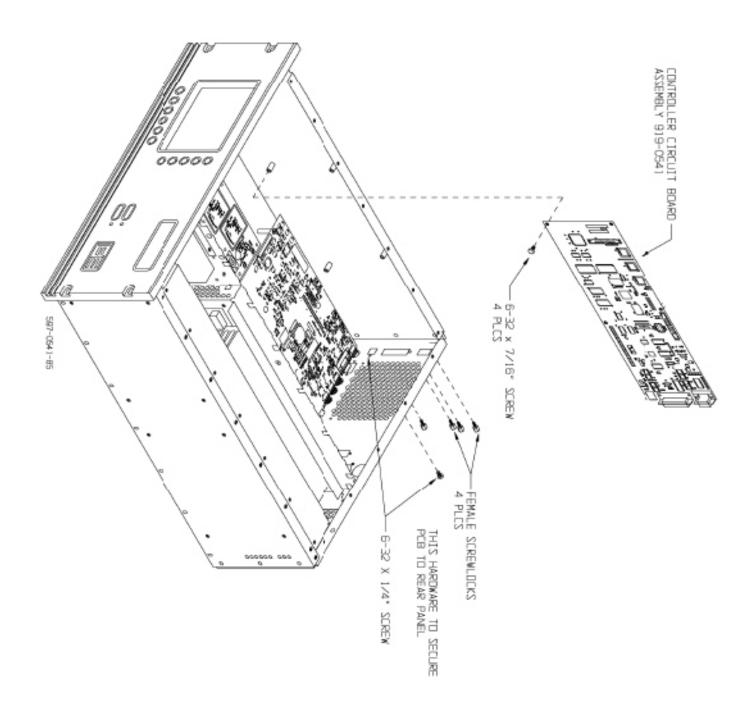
FXi CONTROLLER BOARD REMOVAL AND REINSTALLATION (SHEET 1 OF 2)
